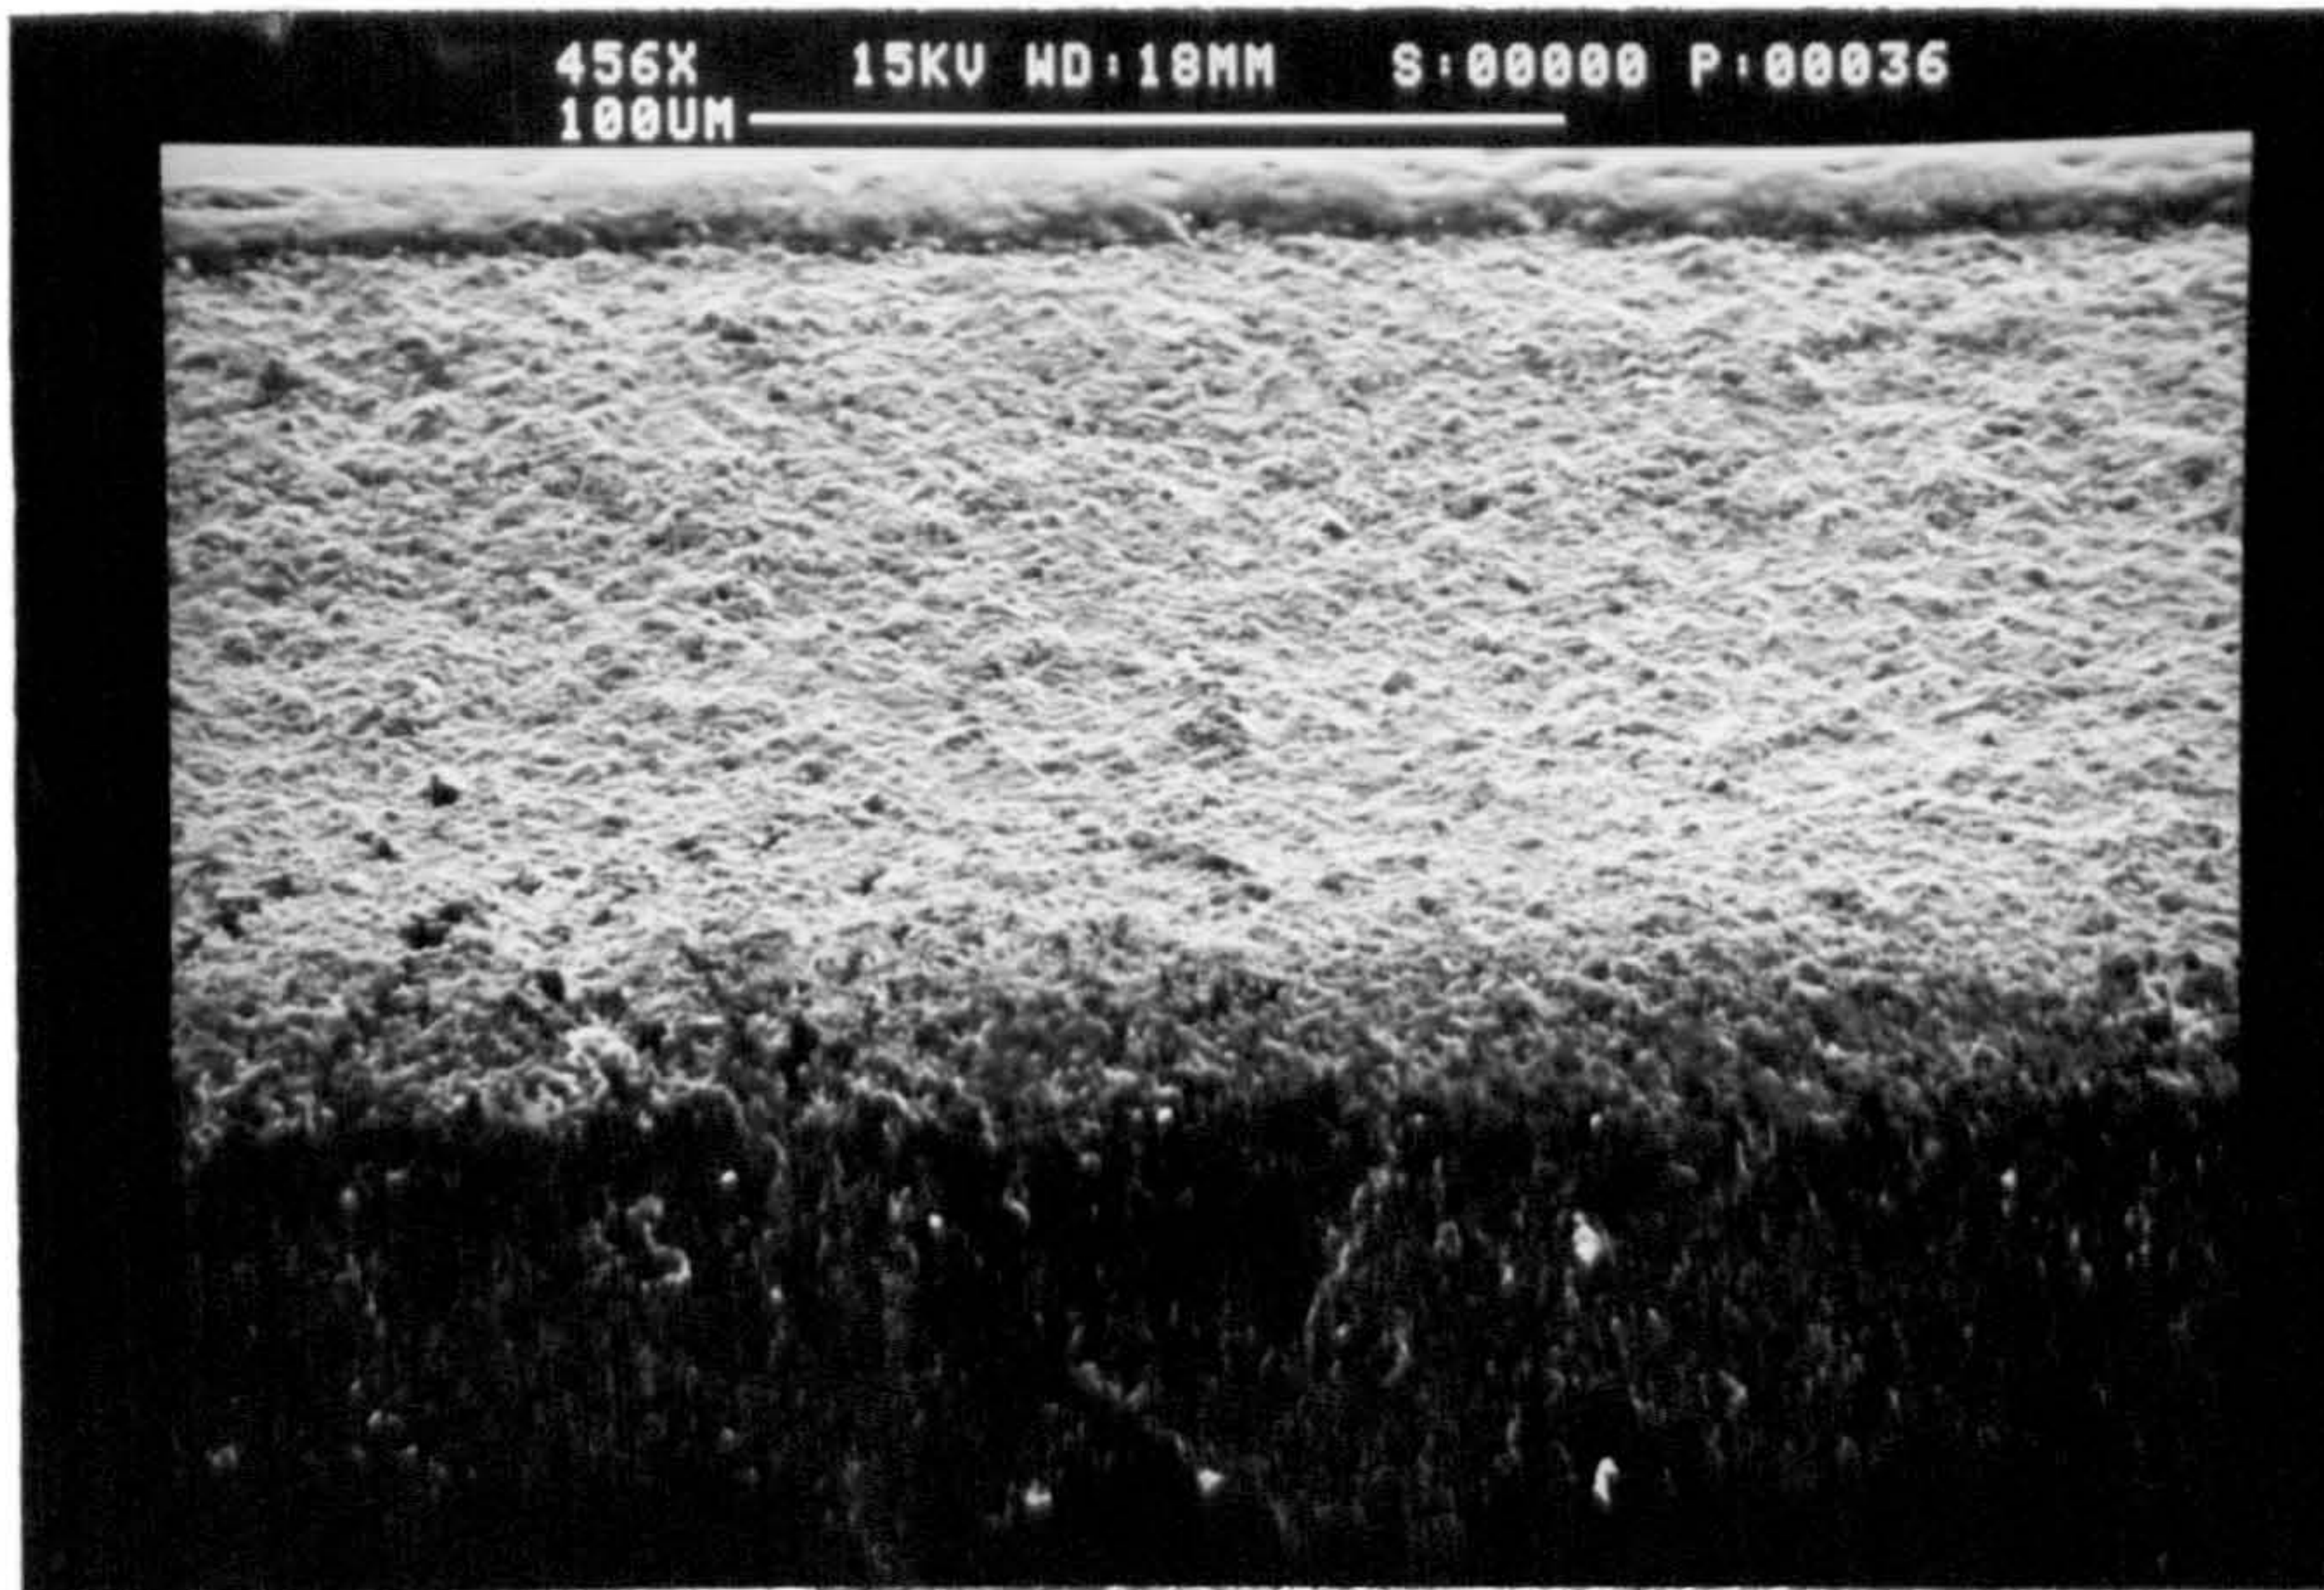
Wear lands of triple-coated carbide tool at the middle of the depth of cut showing rough worn surfaces
